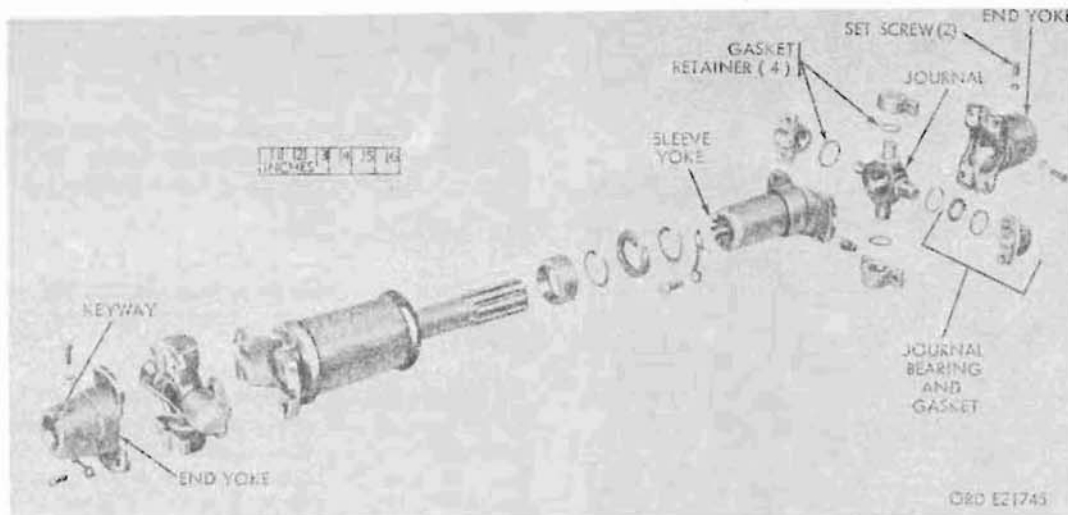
Hydraulic pump drive shaft, M108 - exploded view
